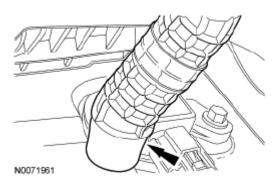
Locating Throttle Body Electrical Connector Courtesy of FORD MOTOR CO.
